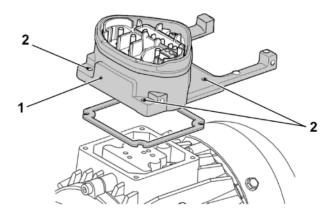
Assembly sequence: Connection box – adapter plate (sizes A - C)
